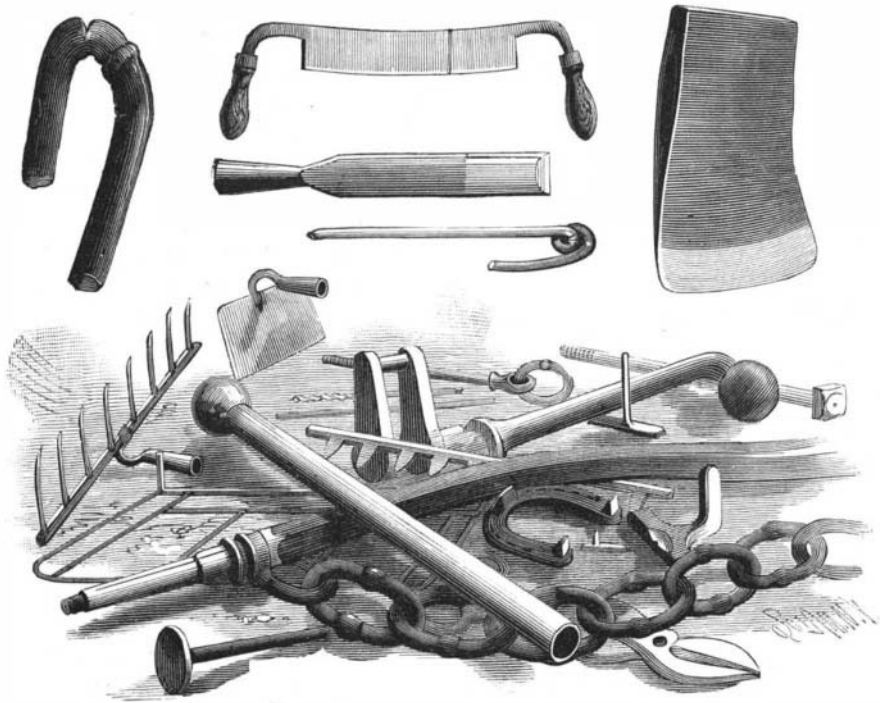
EXAMPLES OF ELECTRIC WELDING.
